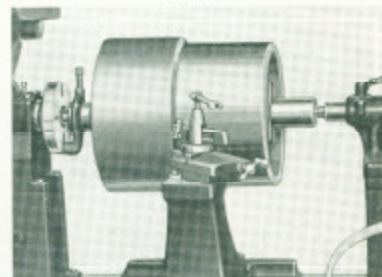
Taking a cut on a large cast iron pulley held on mandrel between centers on the No. 2 Brake Drum Lathe.
